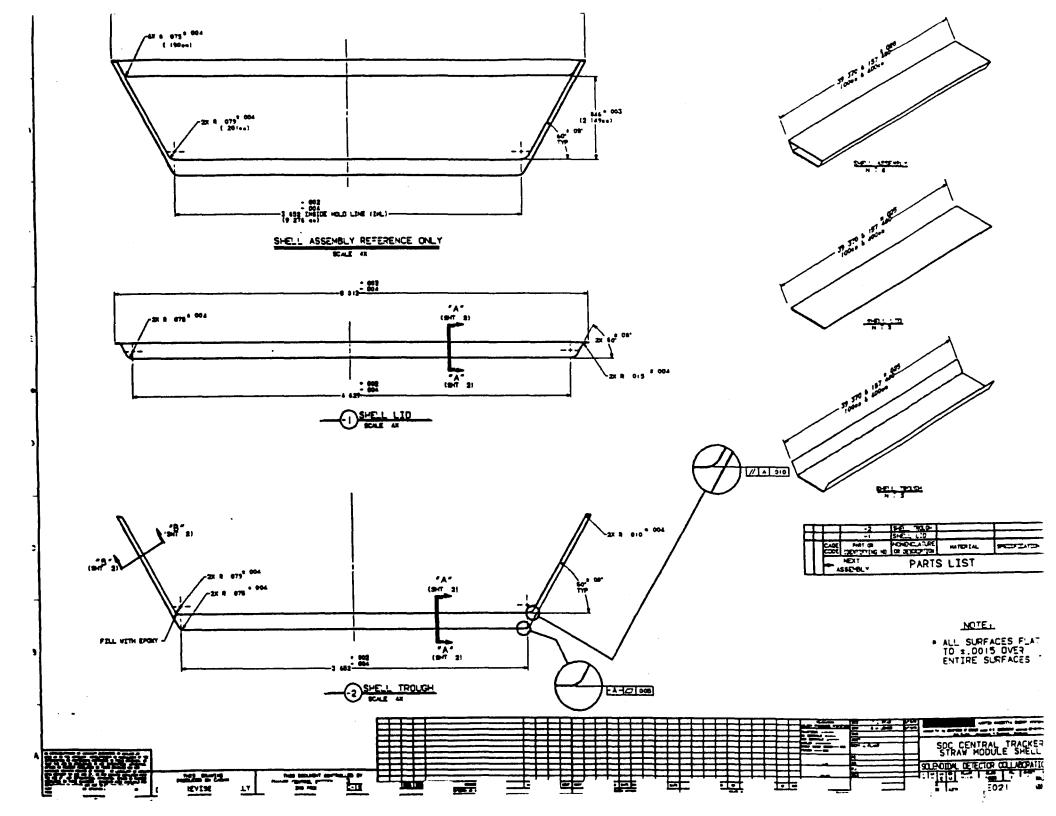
E021147A001 depicts the dimensions and tolerances of the module, with the inside mold line to be considered the fixed surfaces. The allowable thicknesses listed herein in this specification will determine the outer mold line as shown in the drawing.
